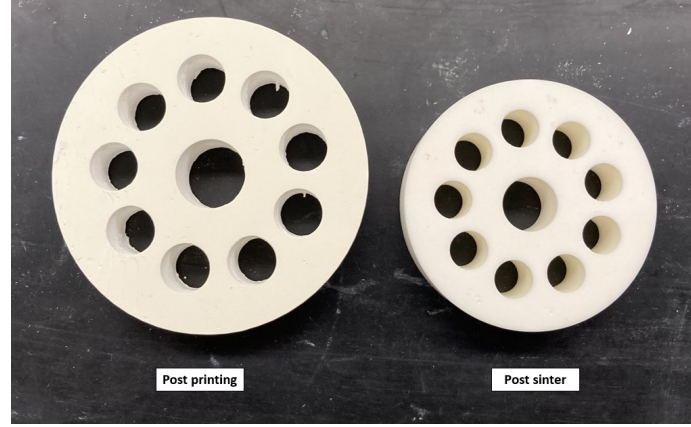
Shrinkage of an alumina hub in the turbine rotor plane direction.
